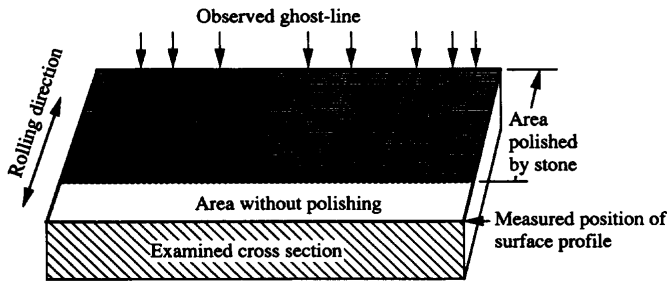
Position examined surface profile and cross section near ghost-lines appeared in a cold rolled sheet after stretching.
